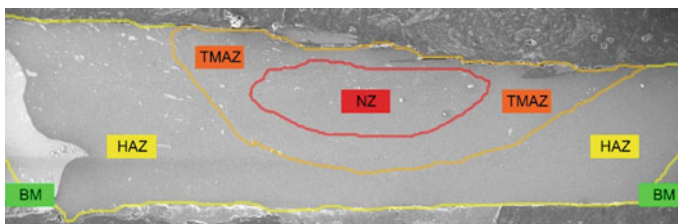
Weld zones of AA6061 and mild steel joint
